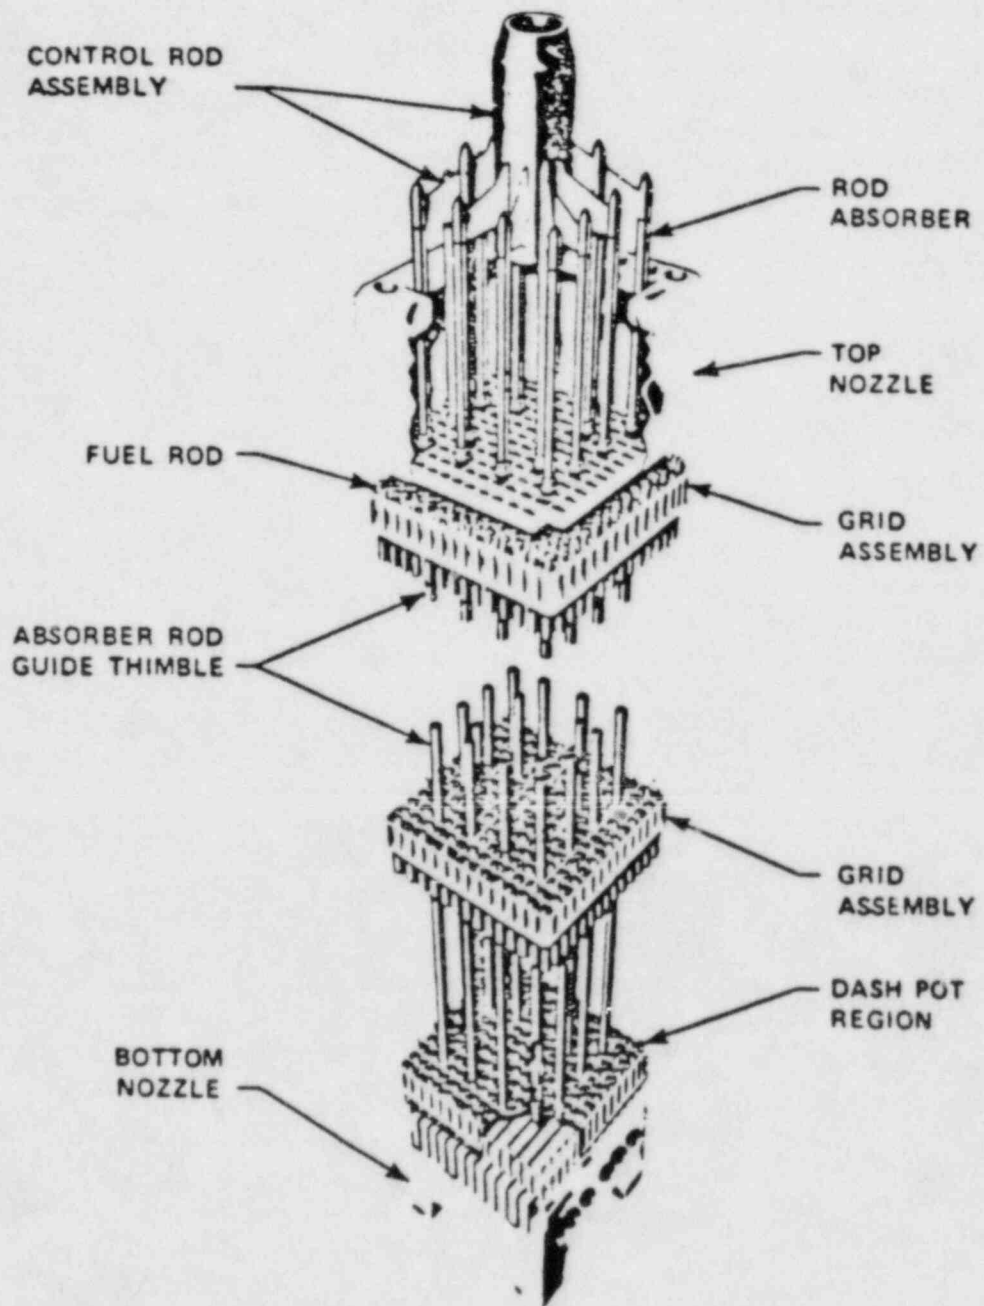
Cutaway of Typical Rod Cluster Assembly
